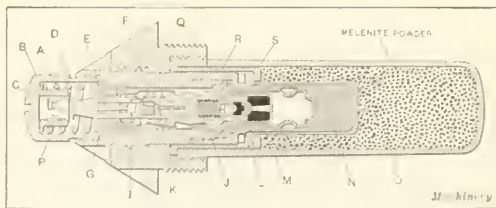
French Detonating Fuse for Use in 75-millimeter High-explosive Shells
